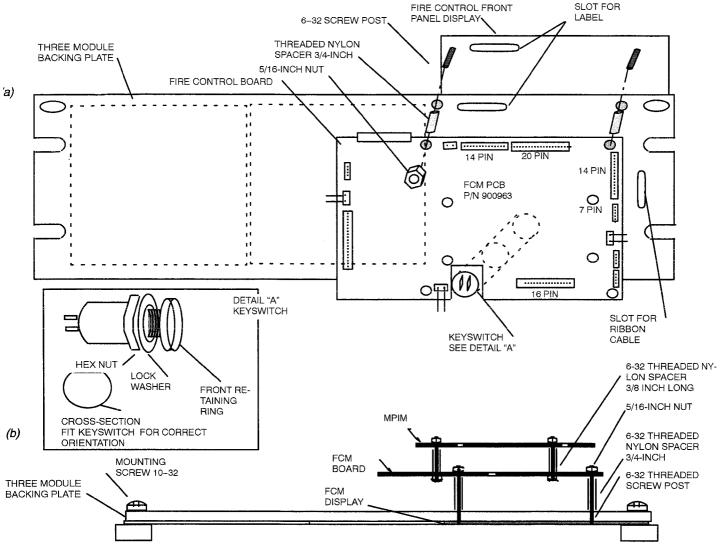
FCM Fire Control Module. (a) Back view with mounting plate, (b) Side view mounting installation.
